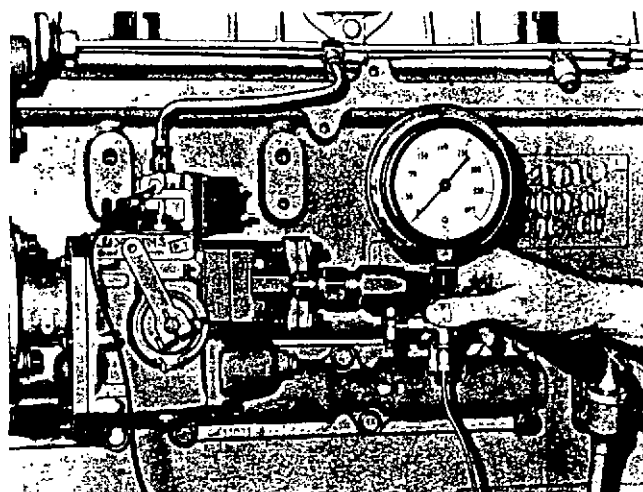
, N11491. Checking fuel manifold pressure with ST-435
